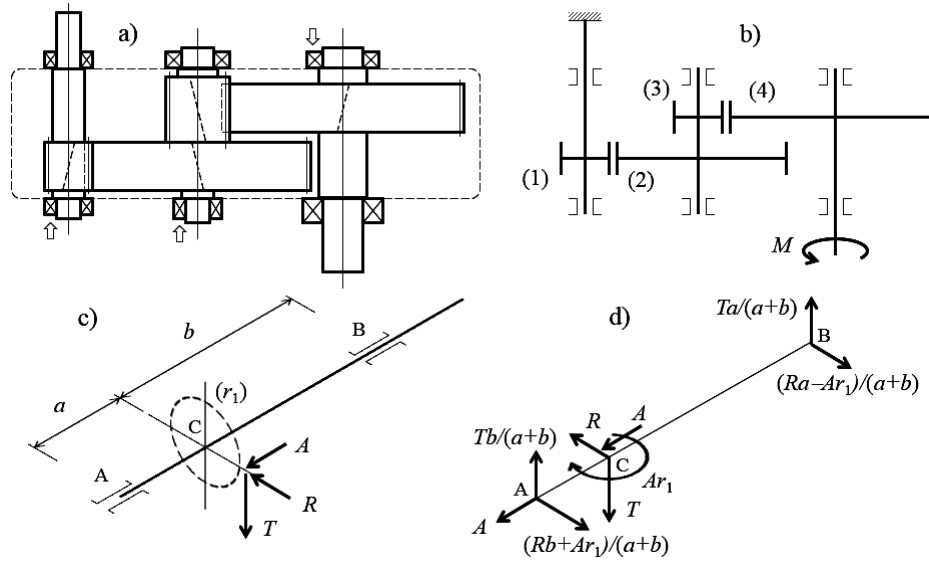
Backlash on parallel helical gears: a) assembly, b) static model, c) forces on input shaft, d) solution
